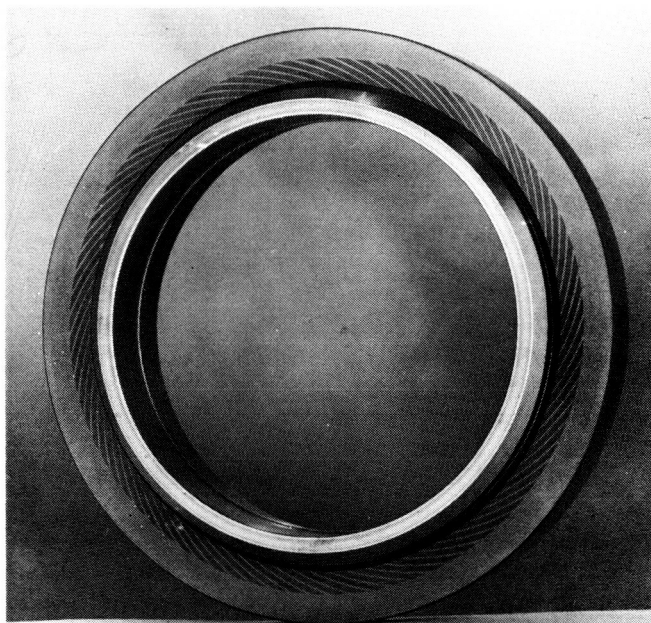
Front View of the Spiral-Grooved Seal Plate Used in the Hybrid Seal (CN-8280)
